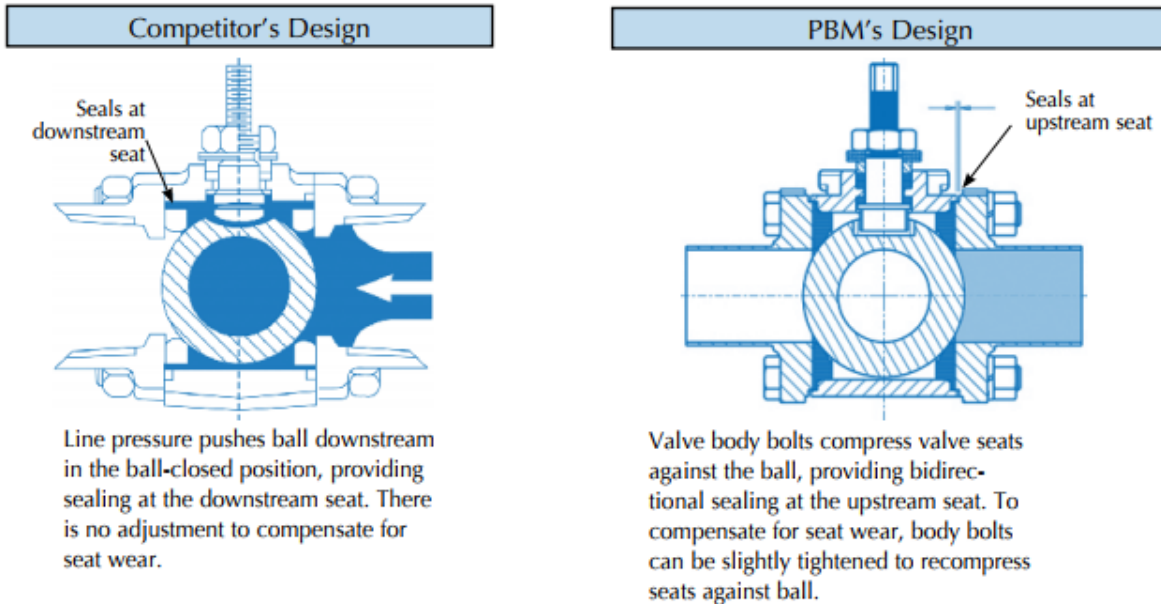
PBM Adjust-O-Seal Example. Adapted from PBM Valve Solutions
